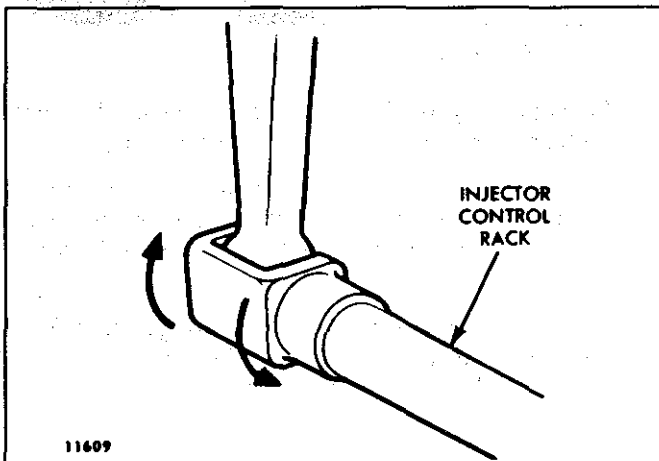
Checking Rotating Movement of Injector Control Rack
